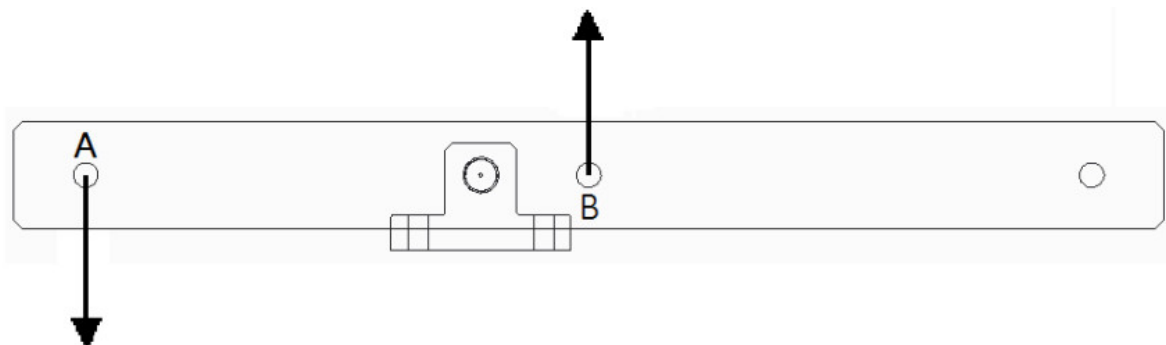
Lever Beam Concept with Rolling Support (8)
